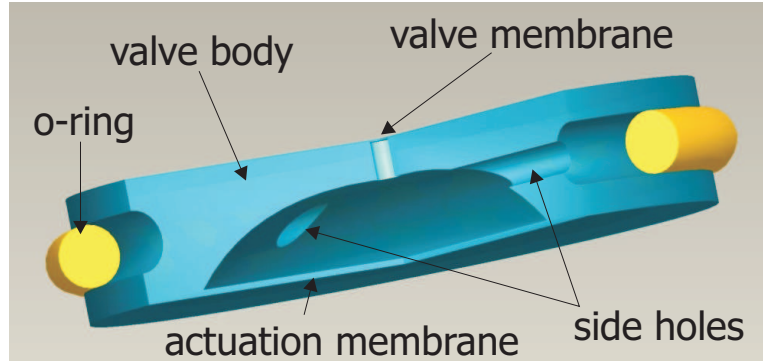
Two side holes allowed to fill the cast valve body with attached actuation membrane. Immersing the device enabled bubble free filling and subsequent mounting an o-ring sealed the chamber and prevented air to be intaken.
